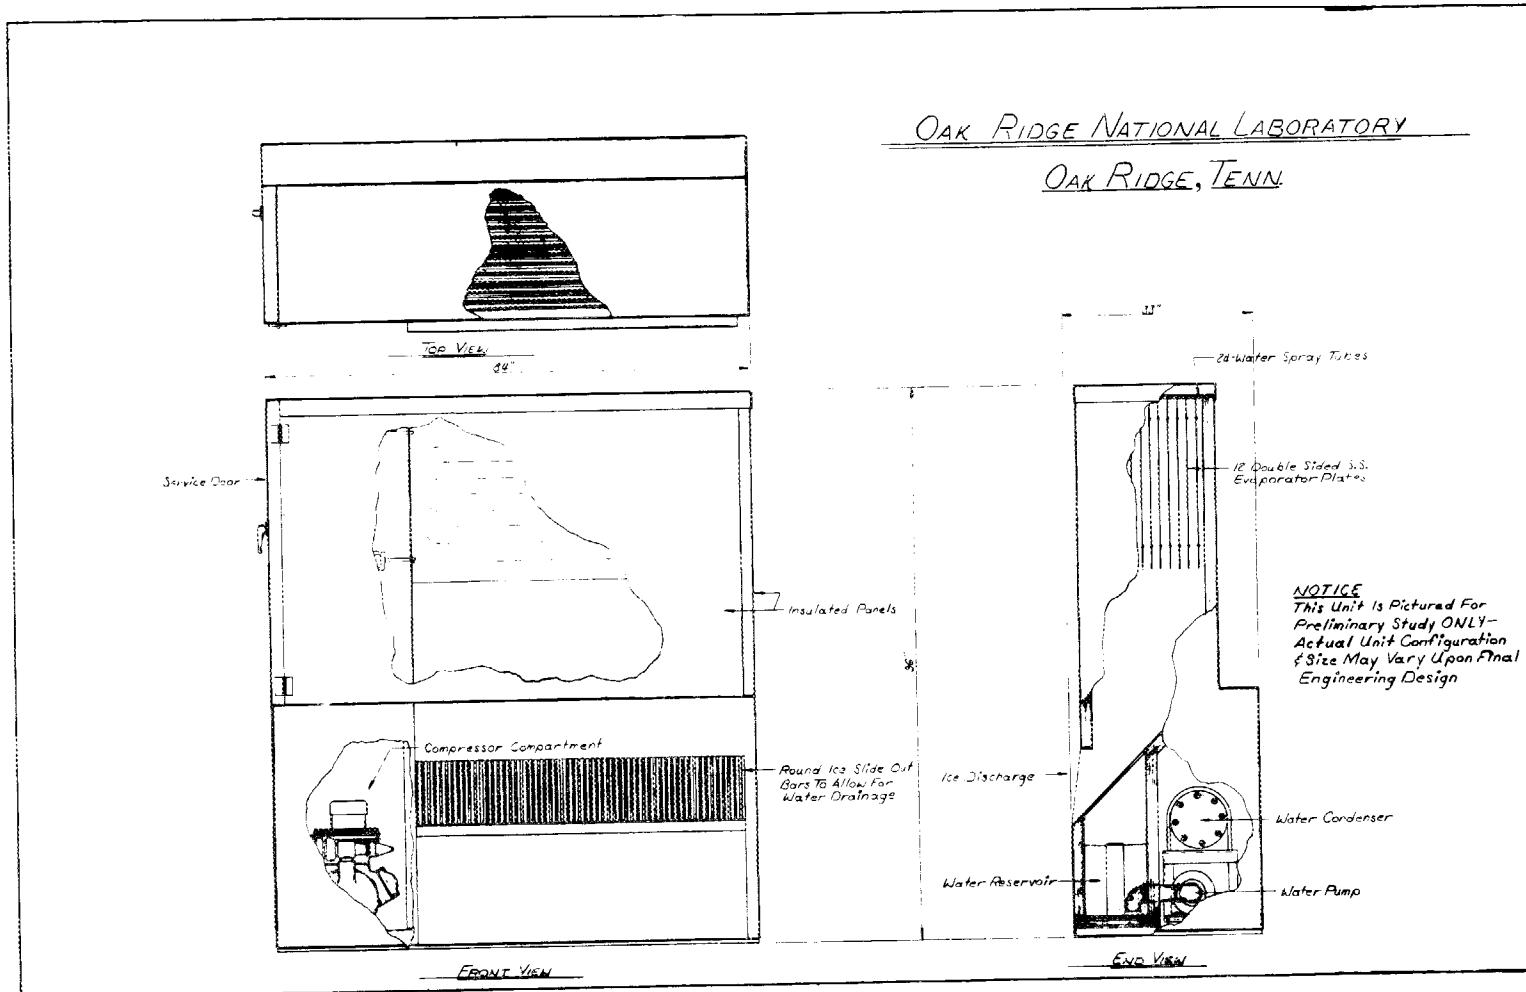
Outline drawing of Turbo ice maker/heat pump.
